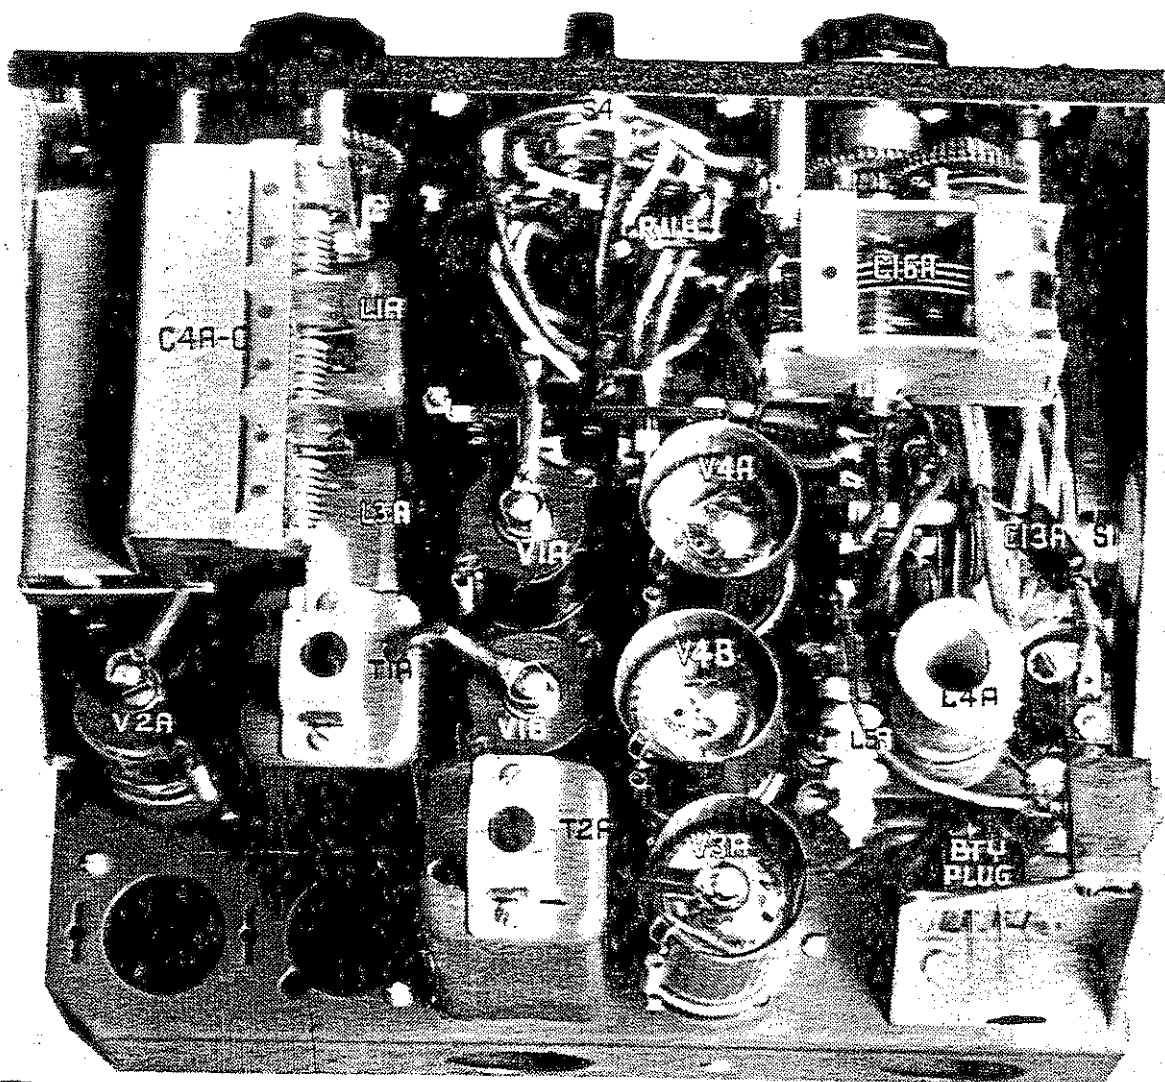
WIRELESS SET NO 108 MK. III Top View CHASSIS
